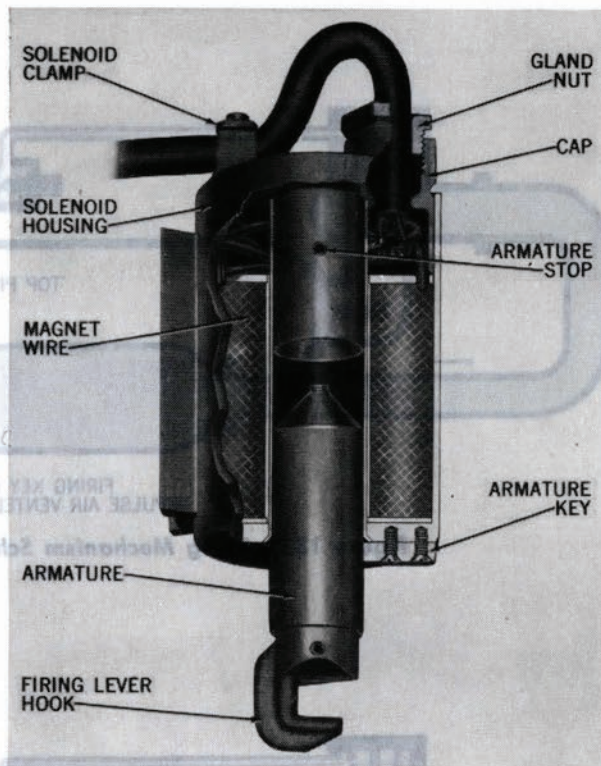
Solenoid—Lever Hook Down—Sectional View.
